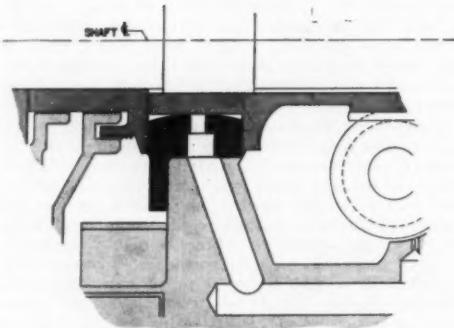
TURBOSUPERCHARGER BEARING—SILVER-LEAD-INDIUM
